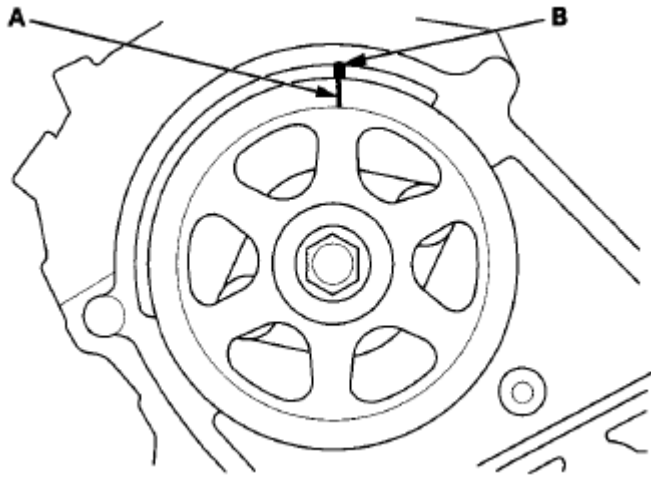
Setting Camshaft Pulleys To TDC - Rear
